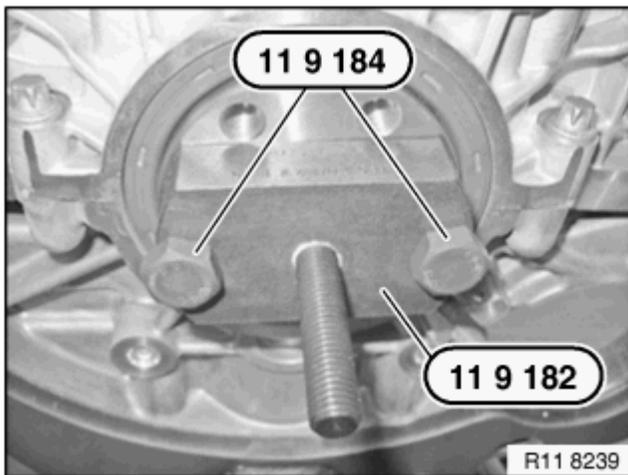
Fastening Special Tool 11 9 182 With Special Tool 11 9 184 On Crankshaft
